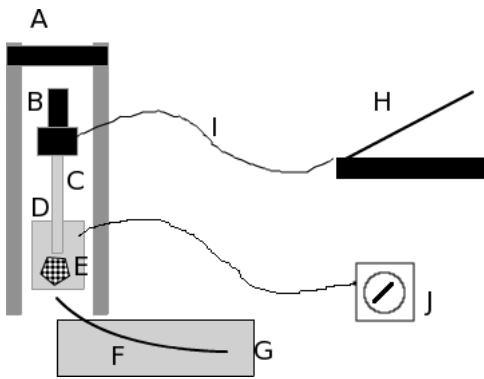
Indium extruder setup: A) extruder stand, B) hydraulic pump, C) steel rod, D) extrusion cylinder, E) indium scrap/ingot fragments, F) finished wire exiting die, G) sterile wipe sheet, H) hand jack, I) hydraulic line, J) thermocouple gauge
